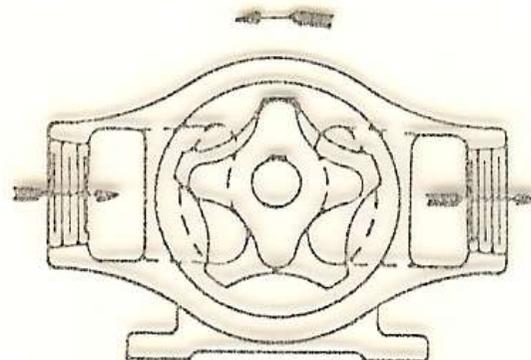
INTERNAL GEAR PUMP (without crescent)
